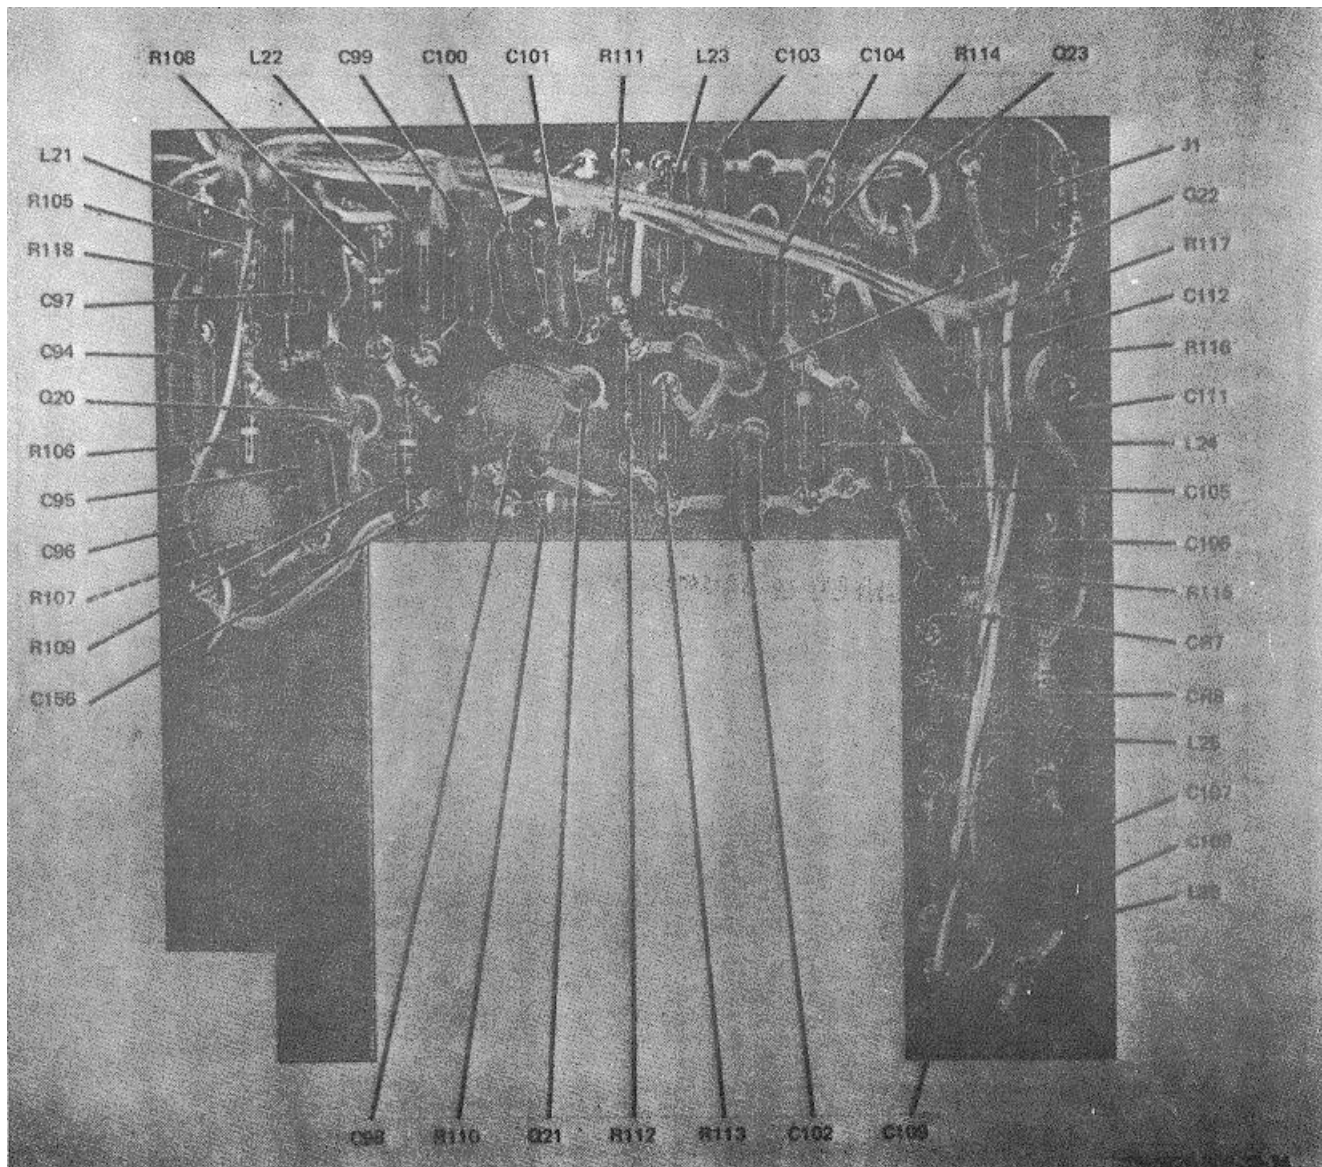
Oscillator Control C-4311/PRC-47 (A8A7), Card Assembly E6.
